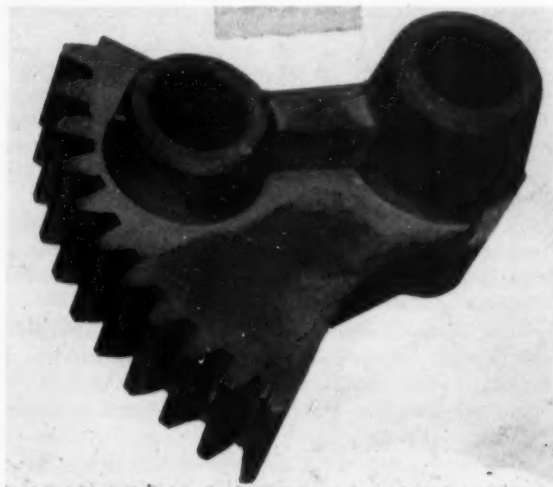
This part was formerly cast in permanent mold to guarantee close metal in teeth. Shell molding has provided good detail and accuracy, with weight reduction.
